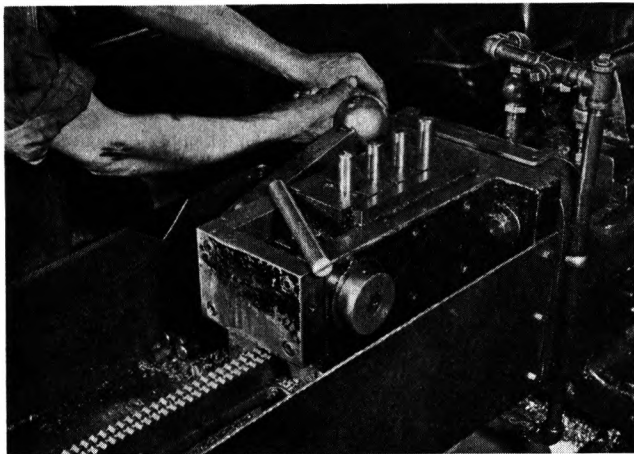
FORMATION OF TONGUE ON THE END OF THE COUNTER-SHAFT, HANDLED ON A HORIZONTAL BROACHING MACHINE
